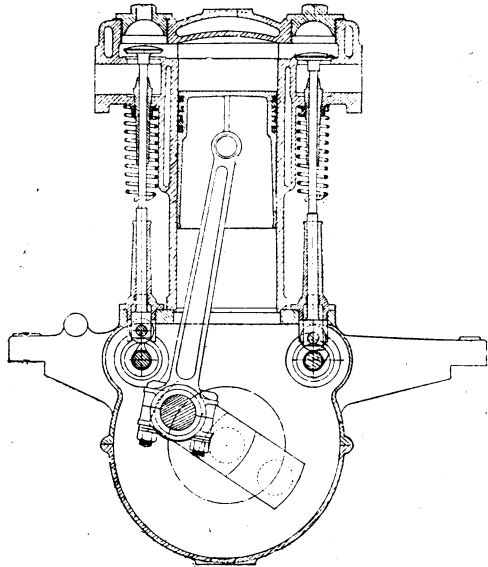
Sectional view of a cylinder. The piston is near the top of its stroke; the connecting rod is seen, its lower end with an adjustable bearing ("big end"). The crank chamber is seen below. At the sides of the cylinder are the inlet and exhaust valves, opened by cams on the half time shafts and closed by strong spiral springs. The inlet valve is open for the admission of a charge. The exhaust valve is closed. (Lent by the Humber Company.)
